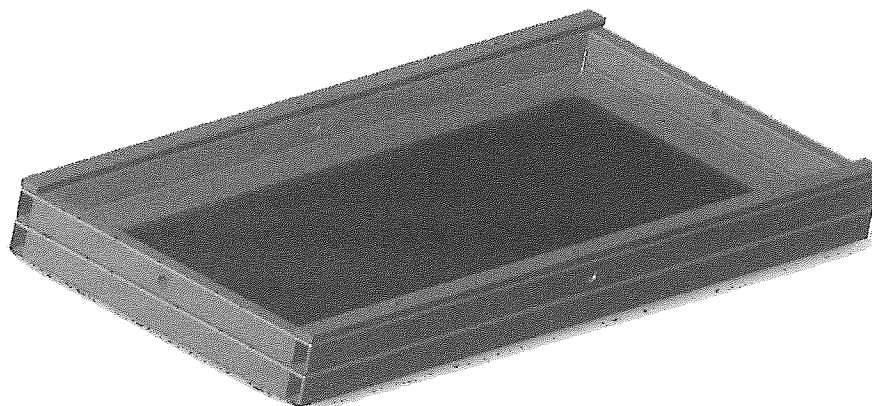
Mechanical drawing of the platform with a sandwiched base plate.
